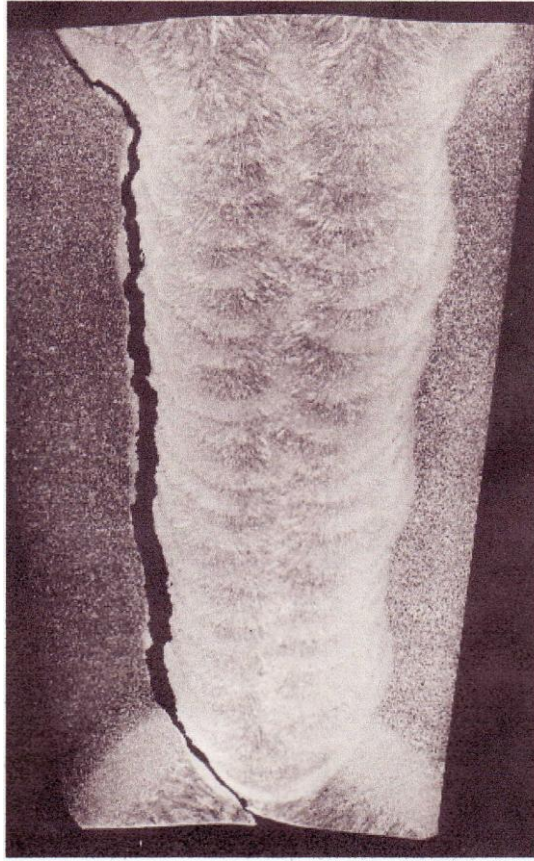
Sketch map of the cracks in ferritic steel weldment [1-7].
